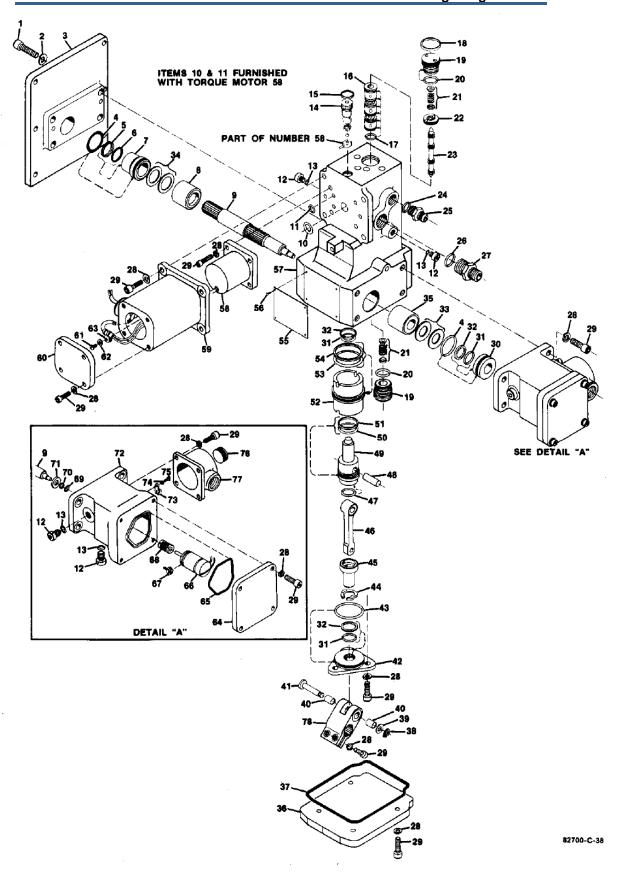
Exploded Drawing, TM-55 Integrating Actuator
